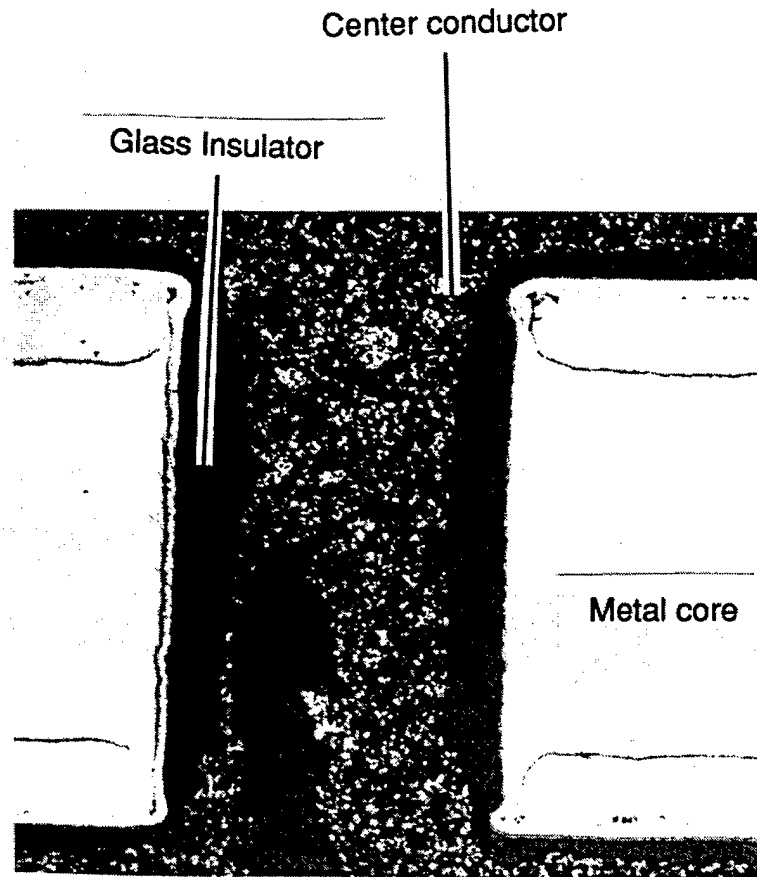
Enlarged view of an electrical feedthrough with a 50 mil square insulating pad and a 30 mil diameter contact pad
